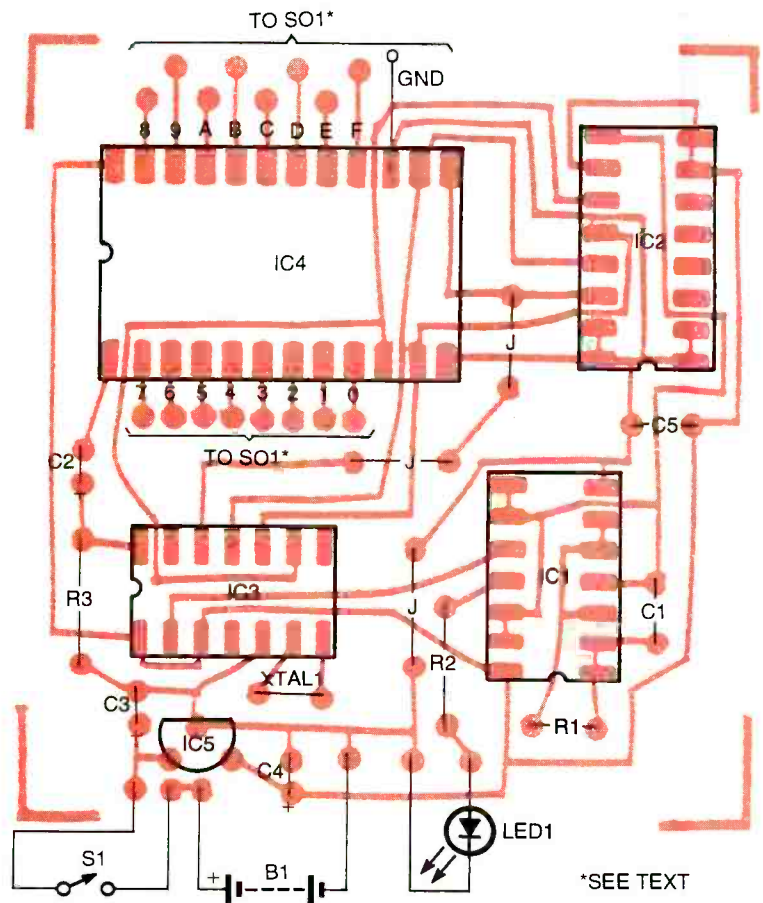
Assemble the tone generator using this parts-placement diagram as a guide, installing the low-profile components (i.e., jumper wires and horizontally-installed resistors) first, followed by the taller units (IC sockets, capacitors, etc.).
